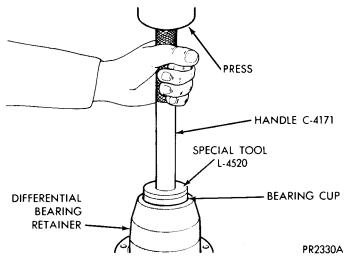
Install Bearing Cup into Differential Bearing Retainer
